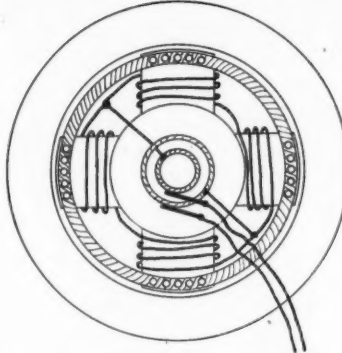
represents a rotor for a four pole motor including slip rings through which direct current is supplied to the rotor windings.
